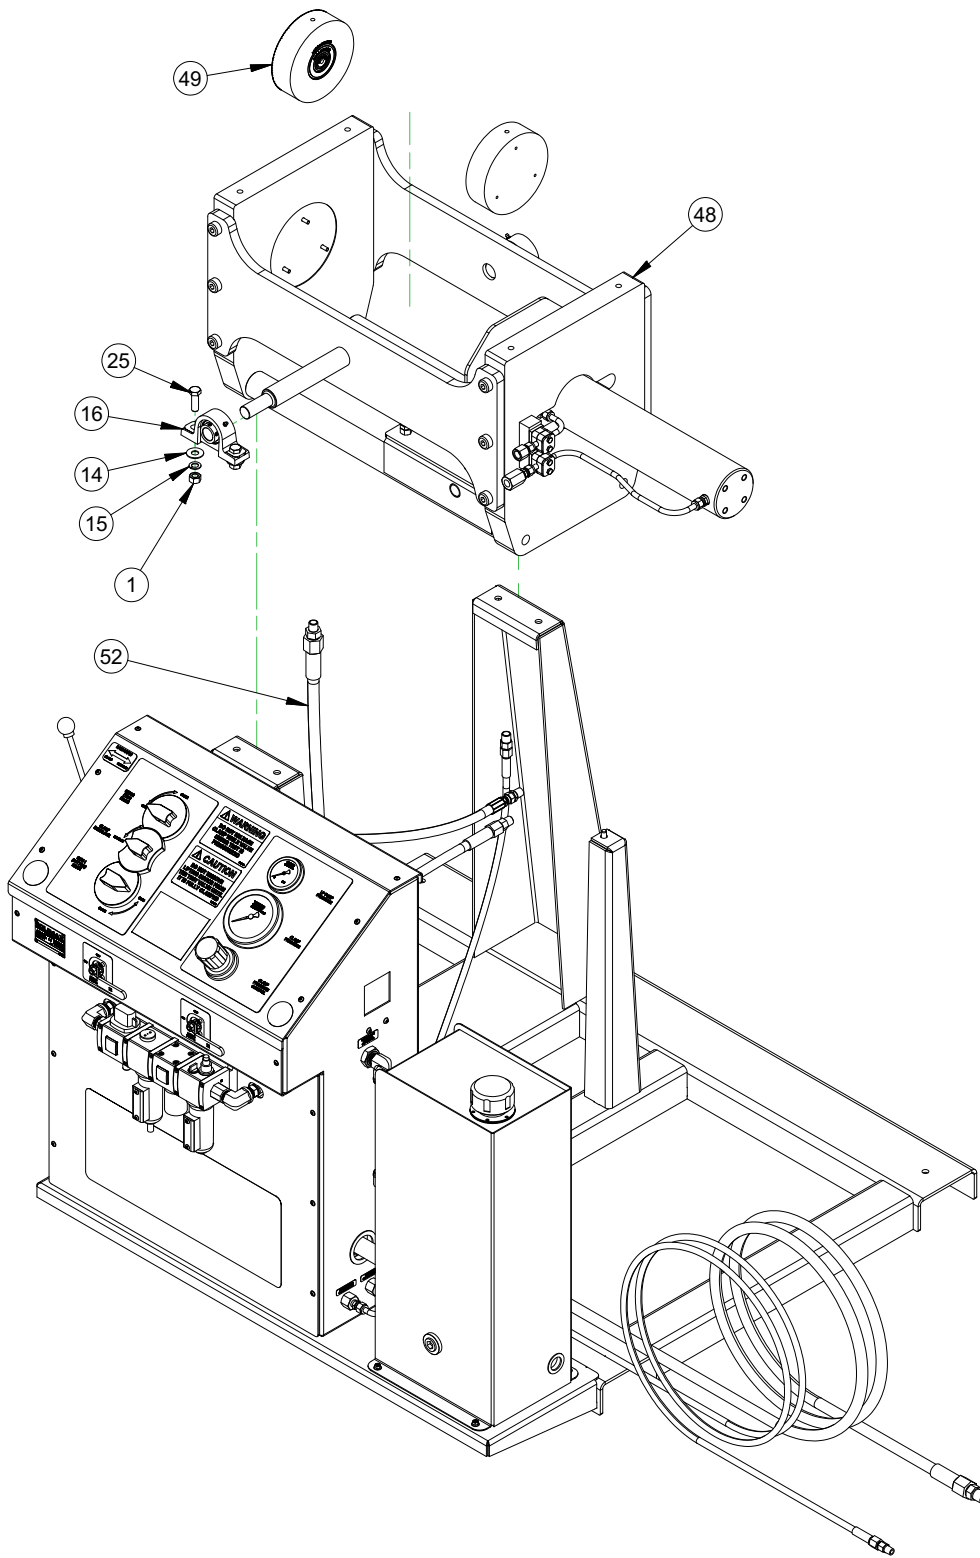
USV-2-25T ASSEMBLY 1 (P/N 90206)
